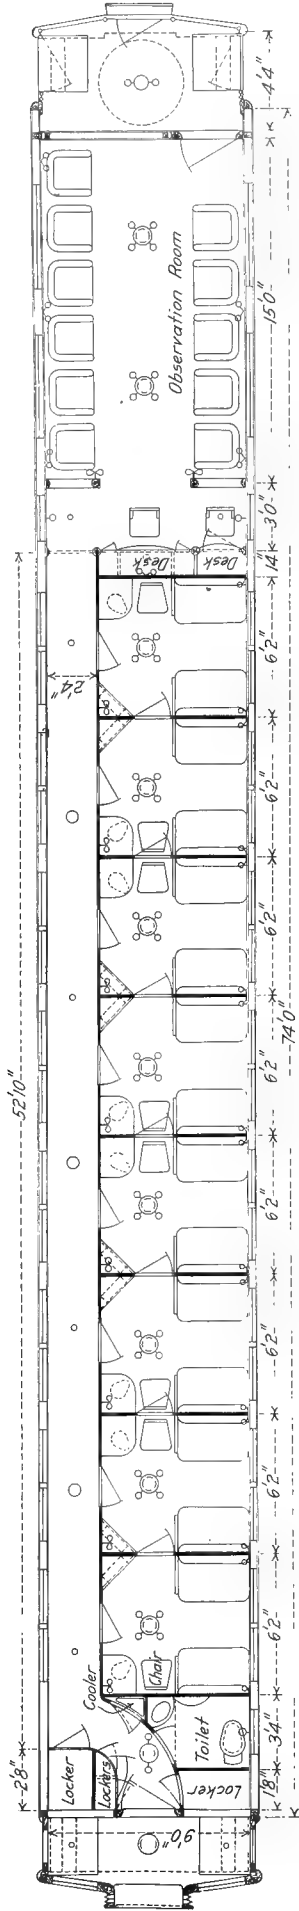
Floor Plan of Chicago, Great Western Compartment Sleeper with Ladies' Observation Room. Builder, The Pullman Co.
